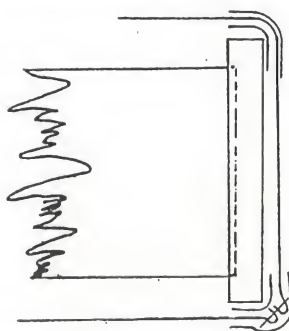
METHOD OF ATTACHING FABRIC AT END RIB
